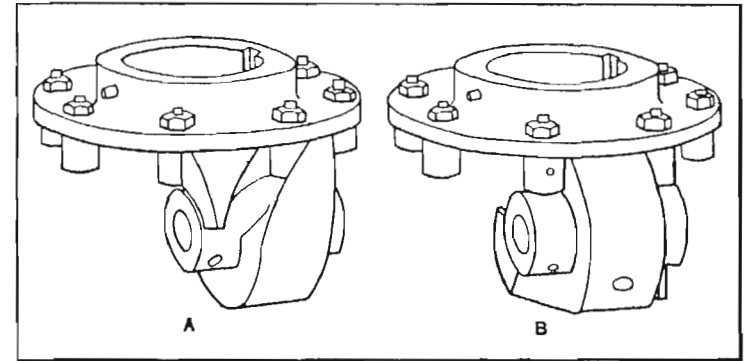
Intermittent Gearing for Shafts at Right Angles
